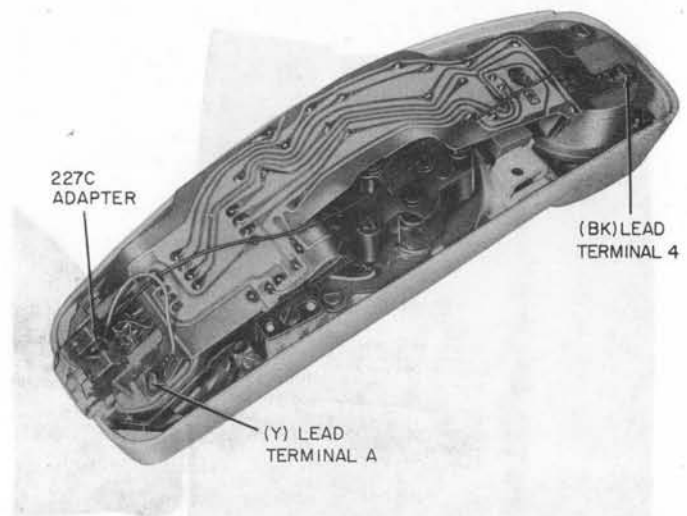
D-180824 Kit of Parts Installed in 220AL Hand Telephone Set
